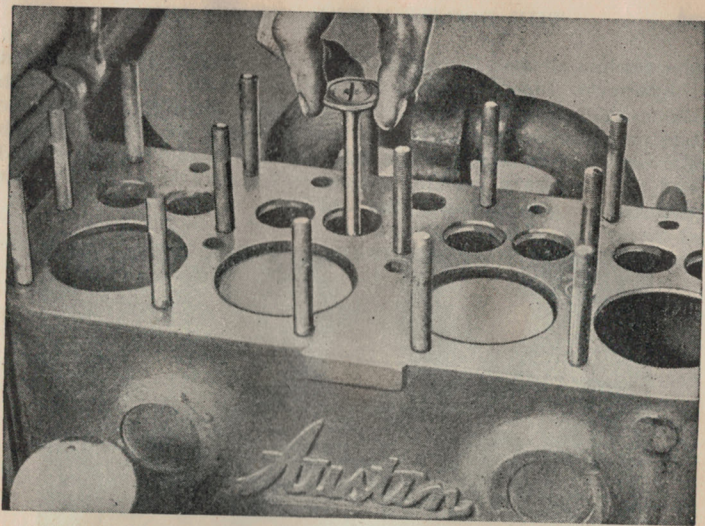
BY MOVING VALVE UP AND DOWN WITH PETROL IN VALVE GUIDES GUMMY DEPOSITS ARE REMOVED
